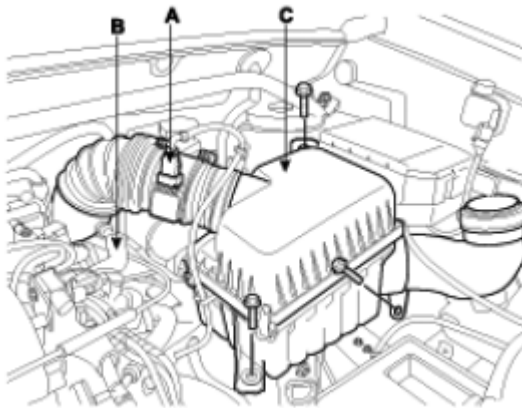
Identifying AFS Connector, Breather Hose And Air Cleaner Assembly
